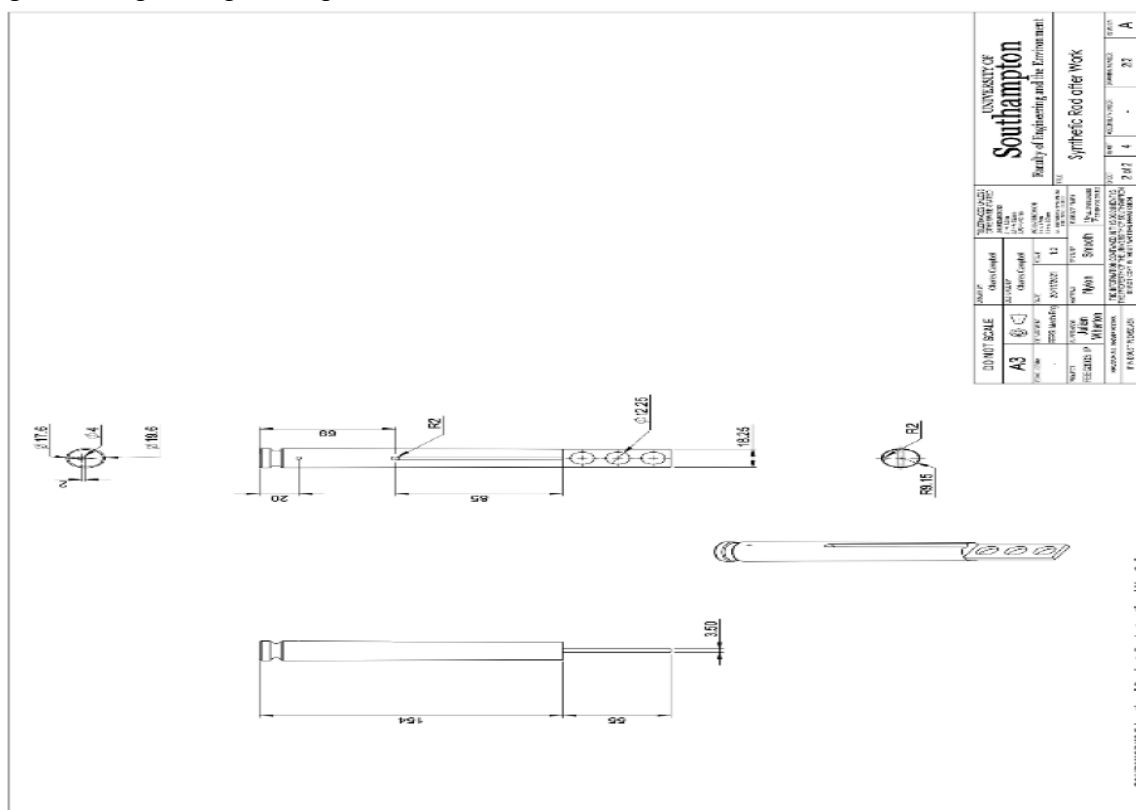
Engineering Drawing of Modified Bioreactor Rod after modifications.
